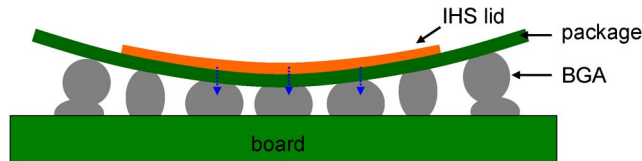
Schematic diagram showing the failure mechanism of BGA solder bridging in a large package with IHS. Due to a heavy package weight and a large warpage of the large package, solder balls in the center collapse under a large pad force and bulge out from pad, leading to a reduction of joint gap distance.
